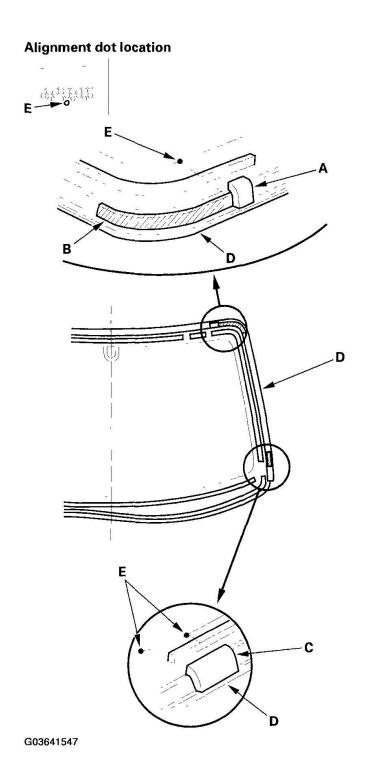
Attaching Molding Upper Seal Courtesy of AMERICAN HONDA MOTOR CO., INC.
